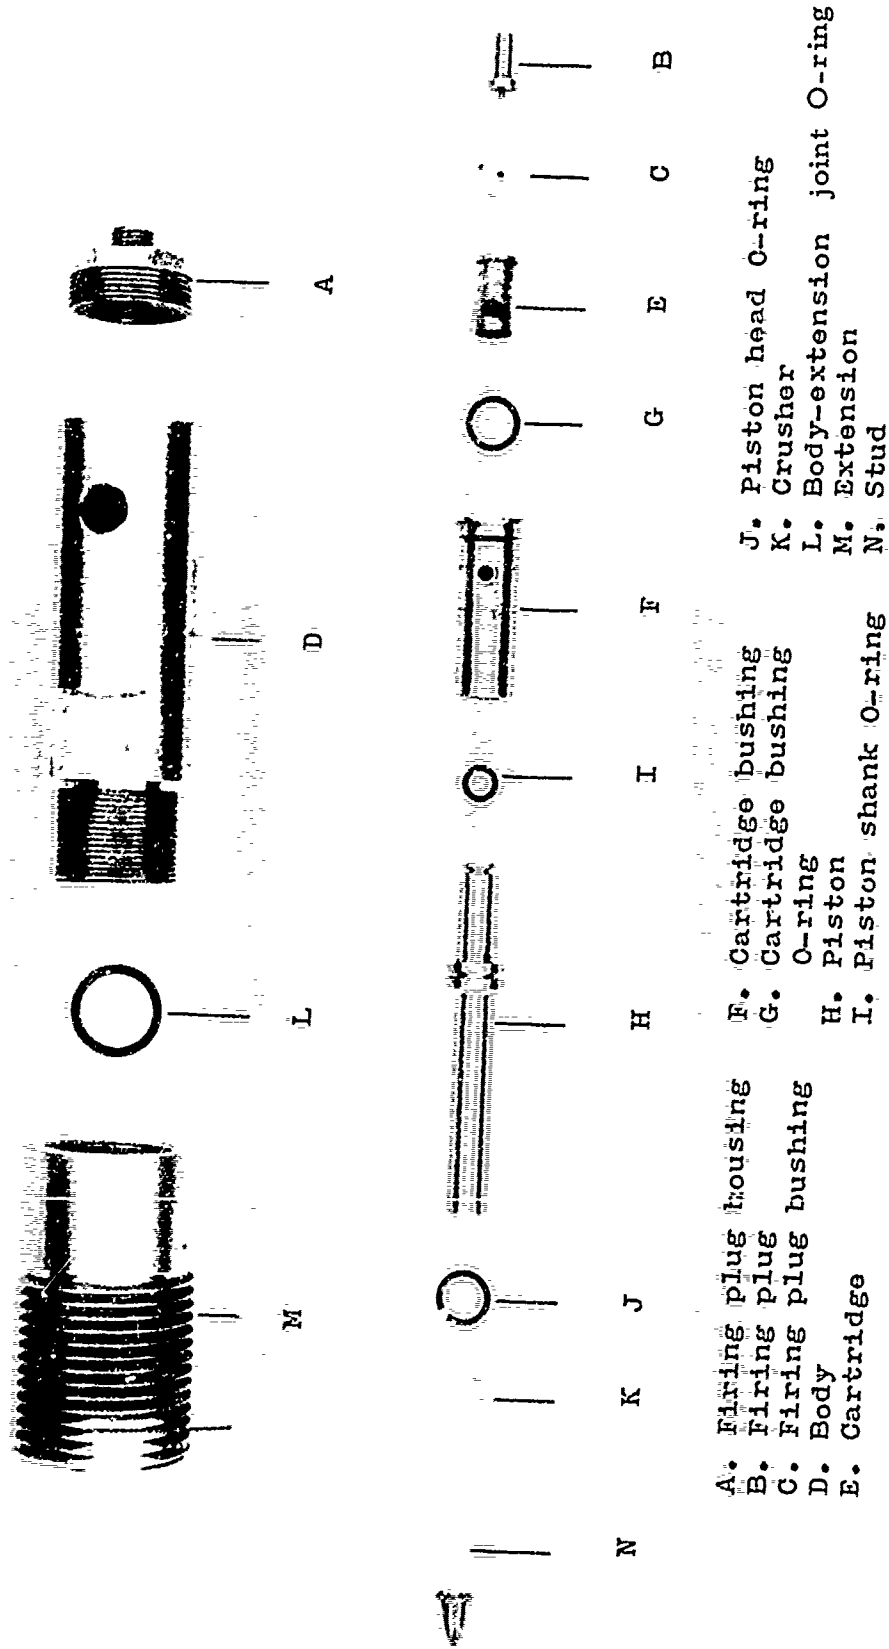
Stud Driving Test Fixture No. 3 Used to Evaluate the Prototype High-Low Ballistic System (Exploded View)
